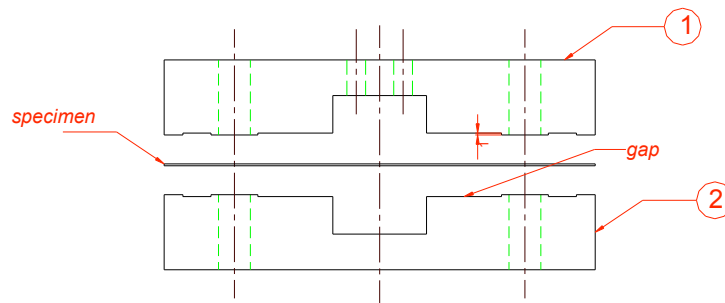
Gap between part 1 (or 2) and the specimen in order to add lubrication sheets.
